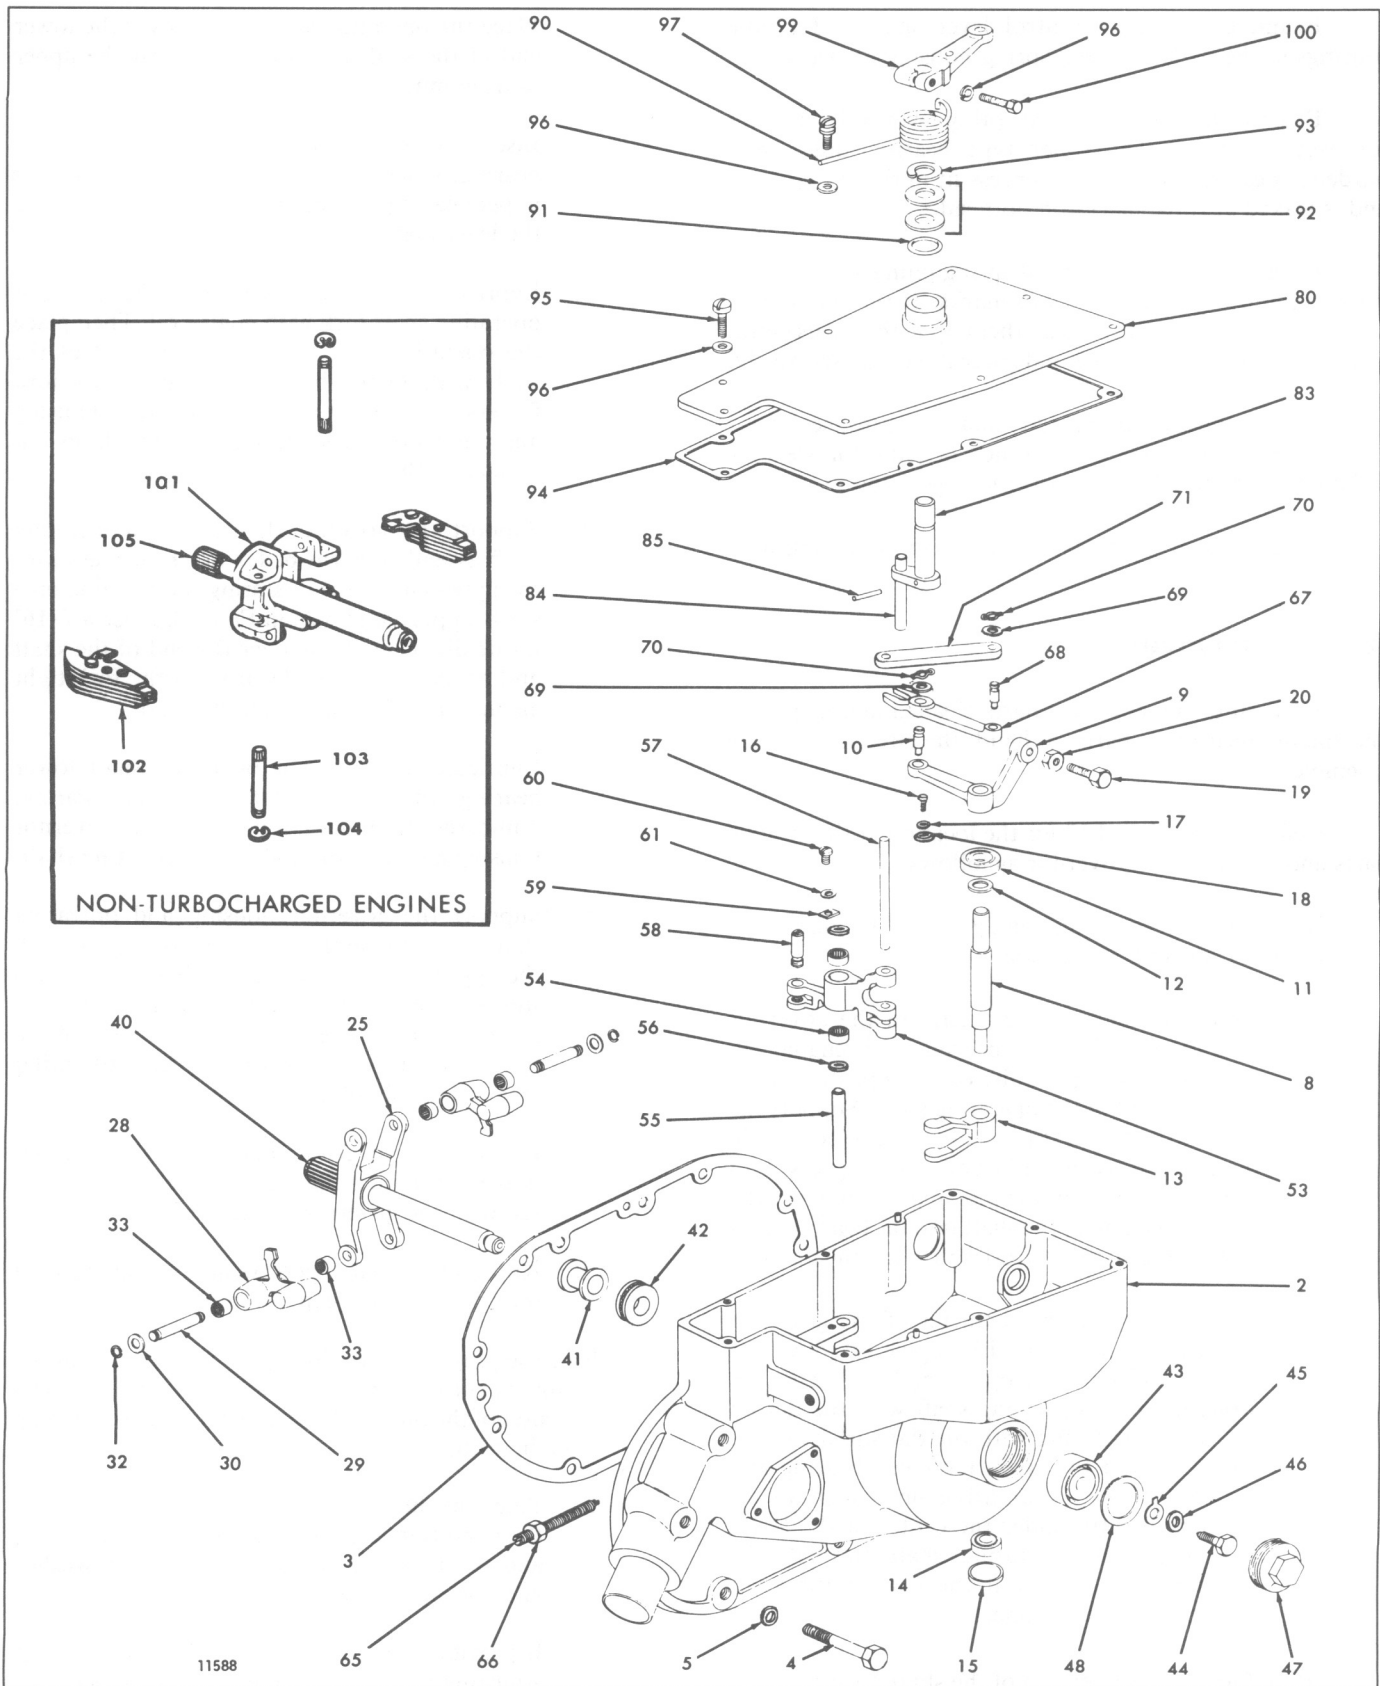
Variable Speed Governor Details and Relative Location of Parts
